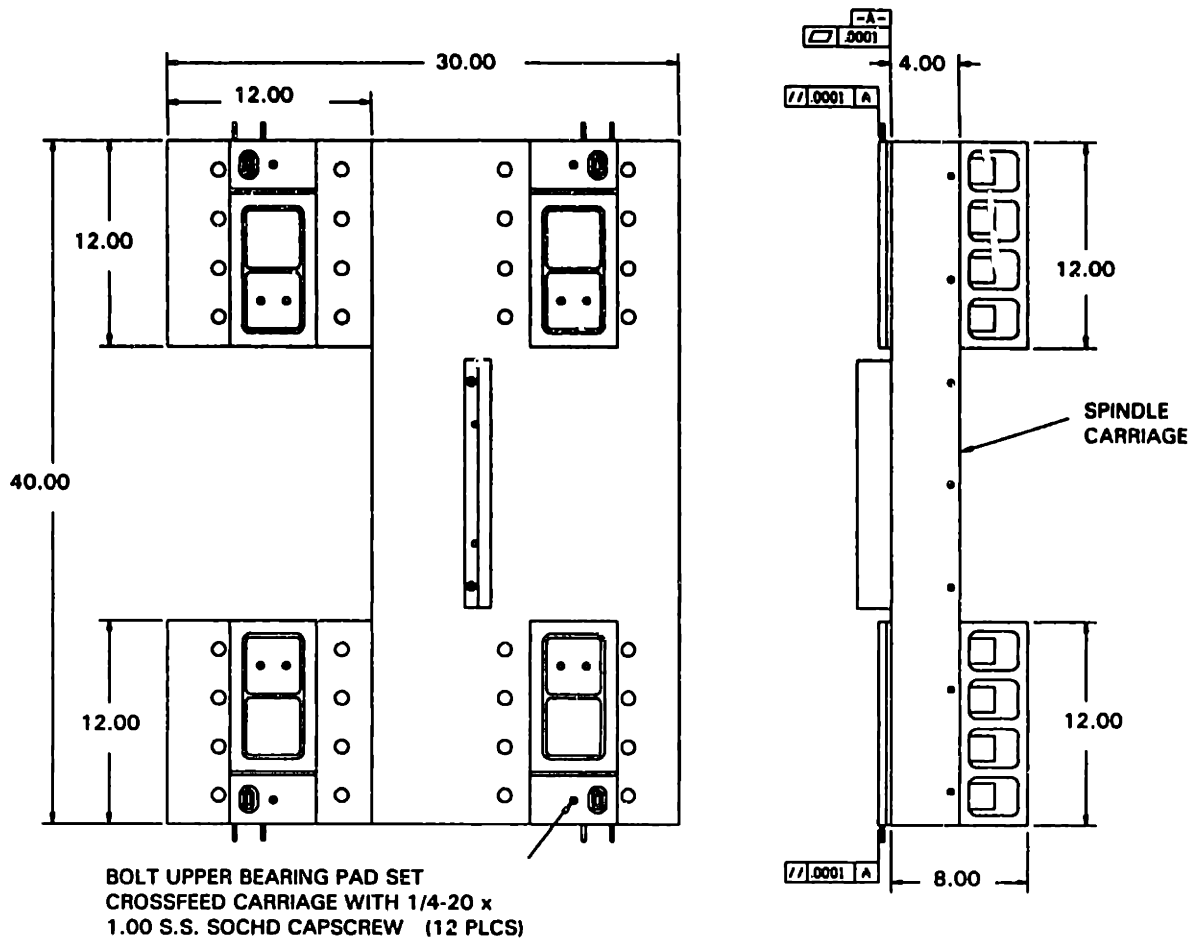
Production drawing of the crossfeed table of the WPGM.
